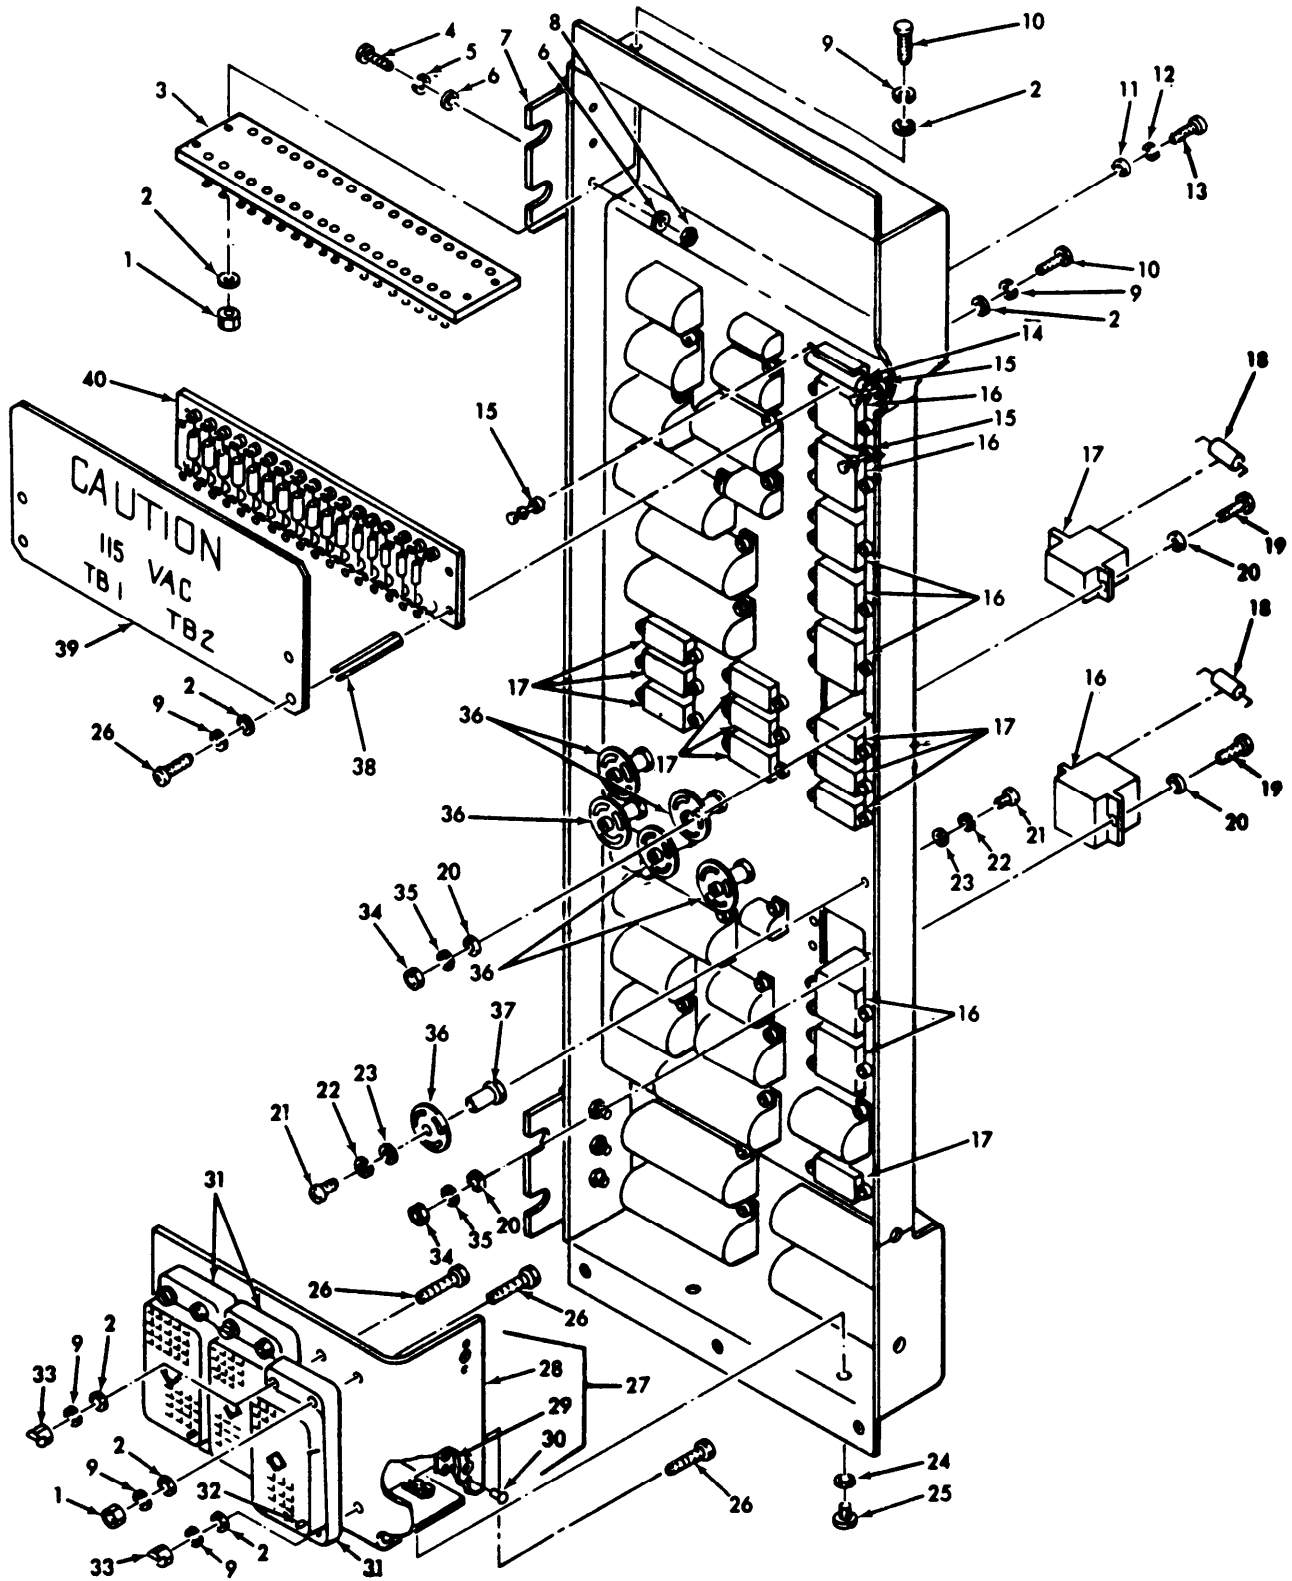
ELECTRICAL LOAD BANK ASSEMBLY A5 COMPONENT PARTS (ASSY P/N 12303405, SHEET 1 OF 2) AND CONNECTOR BRACKET.
